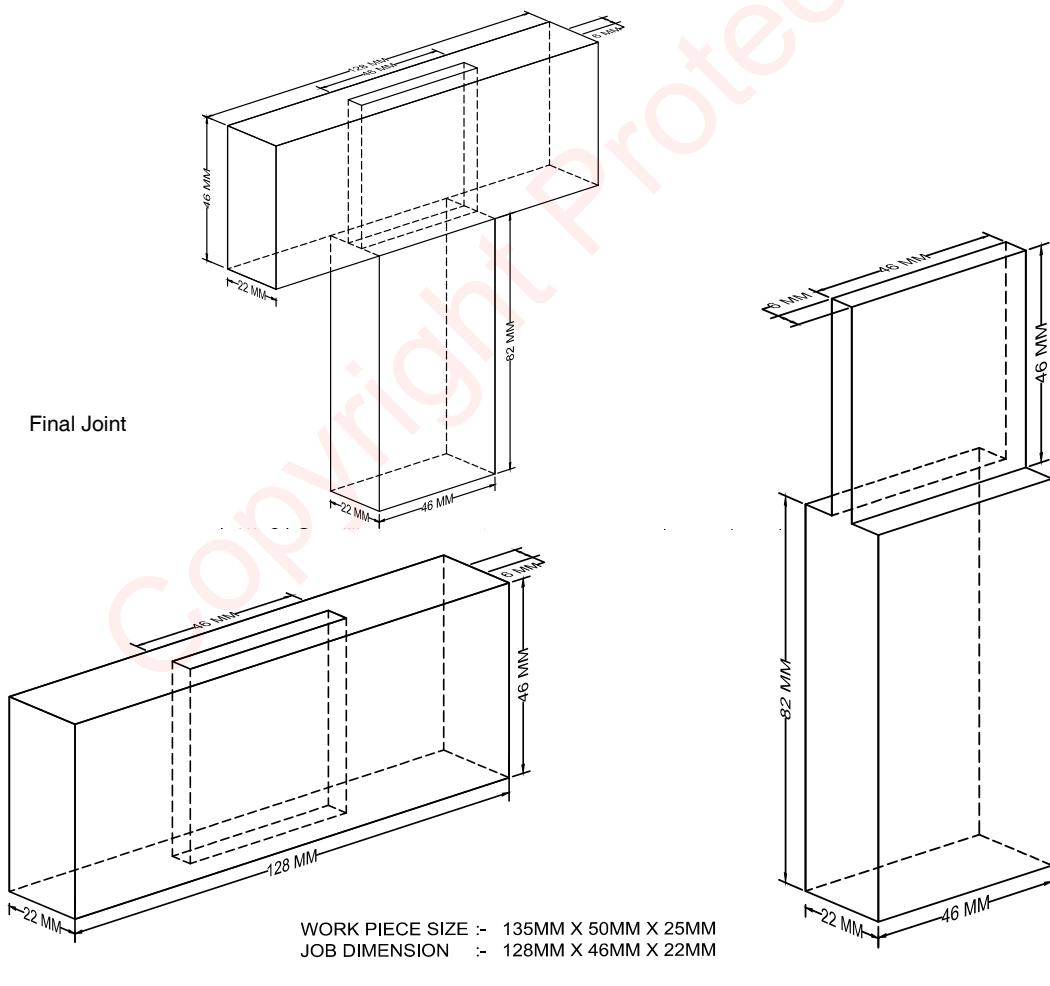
Job Dimensions for Mortise and Tenon Joint
